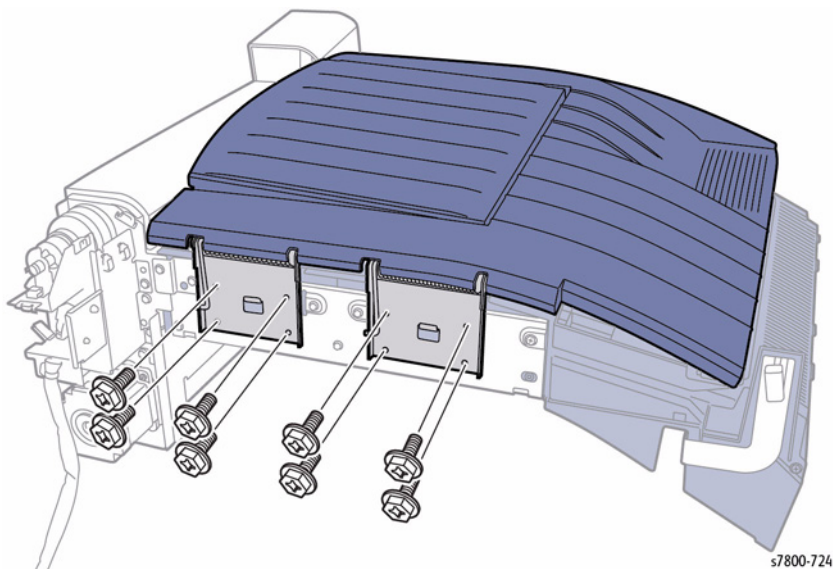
Removing the screws and H-Transport Top Cover Assembly
